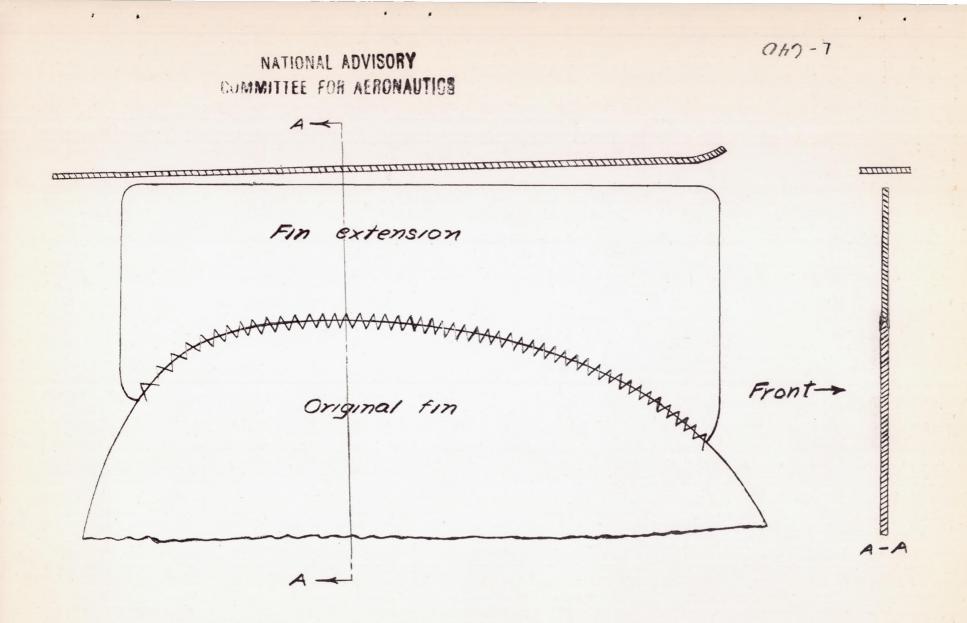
, - Typical butt-welded fin extension as installed on top of cylinder head 1.
